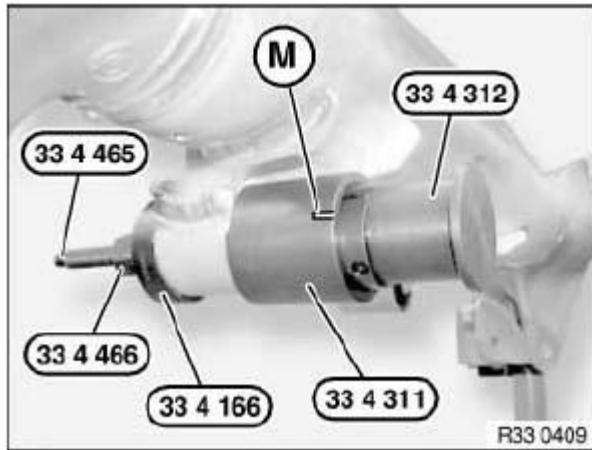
Identifying Special Tools (33 4 465, 33 4 466, 33 4 166, 33 4 311 And 33 4 312)
